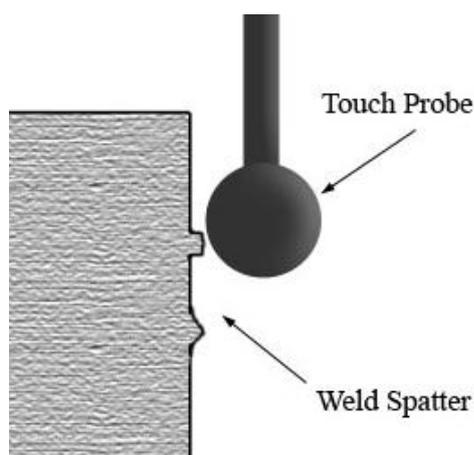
Illustration showing weld spatter affecting the touch probe CMM.
